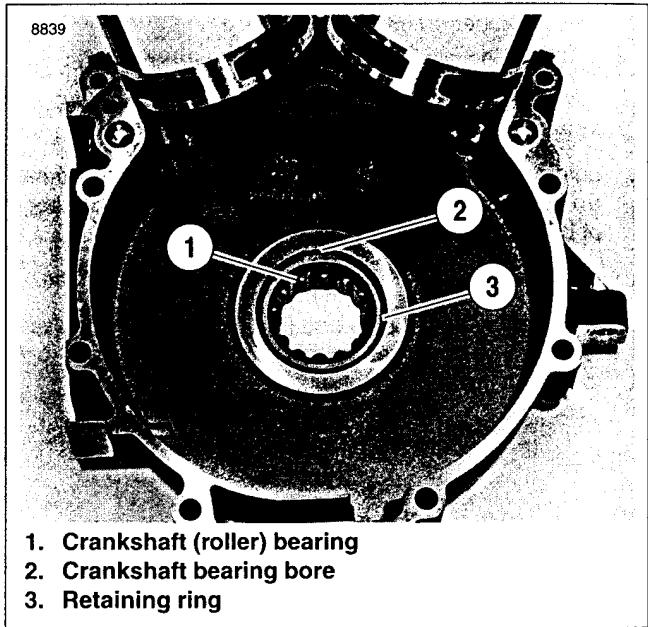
Left Crankshaft (Roller) Bearing Assembly
